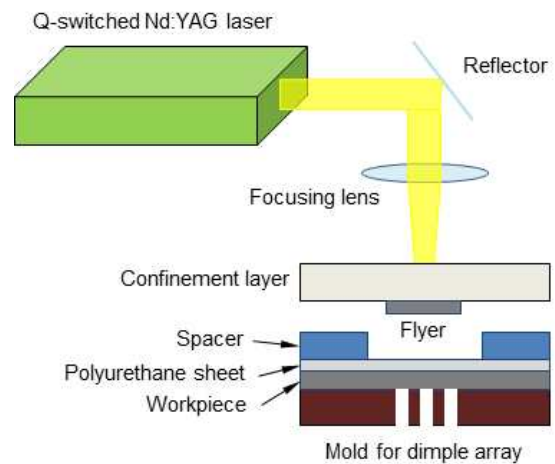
Experimental set-up for microscale dimple array fabrication using laser accelerated flyer impact
